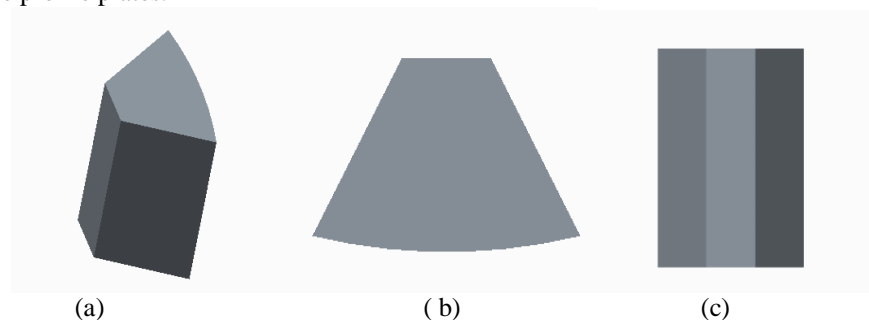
Creo model of Profile Plates (a) slanted view (b) top view (c) front view
